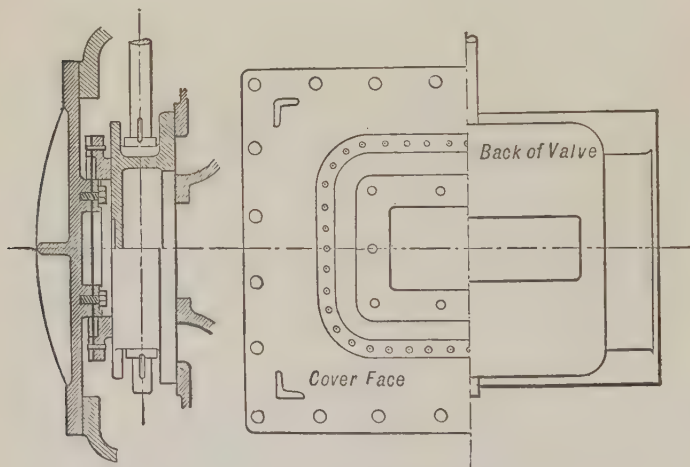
Dawe & Holt's Patent Relief Frame.
